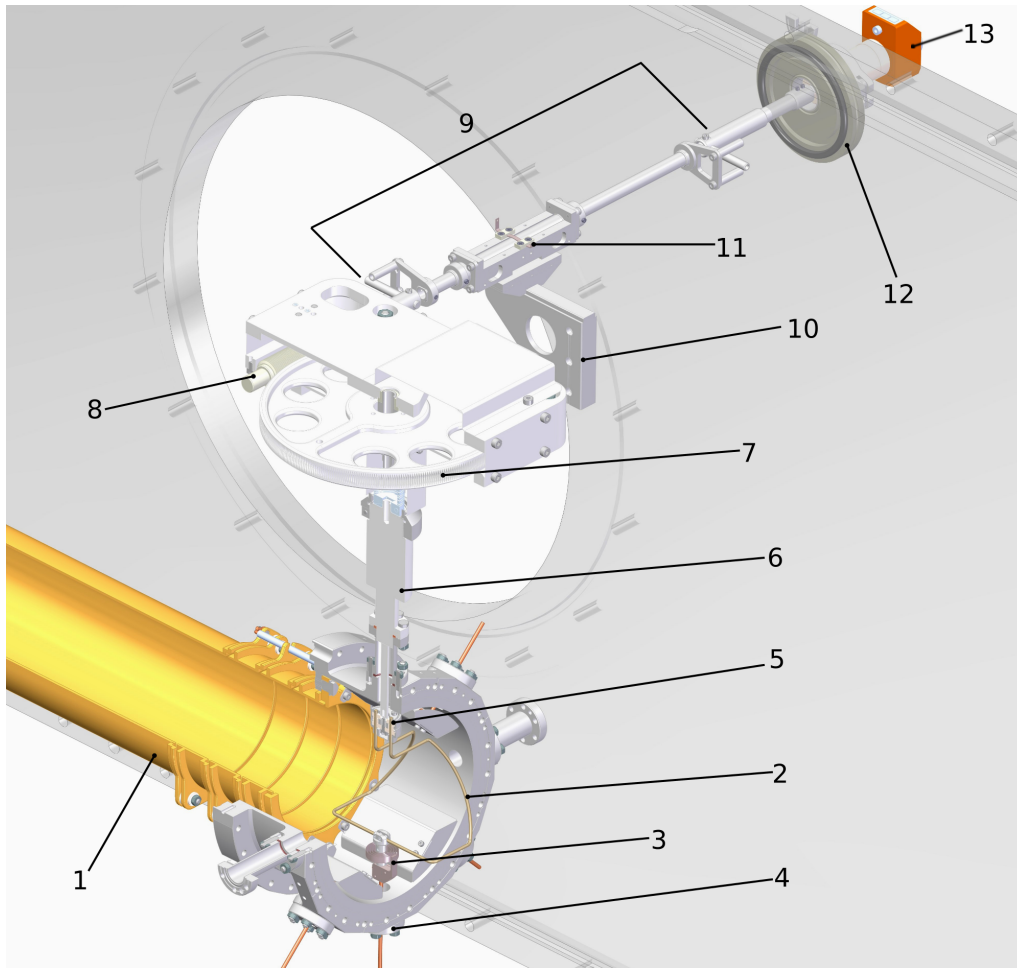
Installation of one wire scanner at the end of the interaction region showing: 1 – drift tube, 2 – scanner wire, 3 – balance spring for electrical connection, 4 – electrical vacuum feedthrough, 5 – carrier, 6 – rotary vacuum feedthrough, 7 – worm gear, 8 – worm screw, 9 – intermediate drive for thermal decoupling CSR experimental vacuum/atmosphere, 10 – mounting of intermediate drive on eCool shield, 11 – titanium spring 12 – isolation vacuum flange, 13 – rotation counter. The grey structure in the background is the outer side vacuum flange of the CSR.
